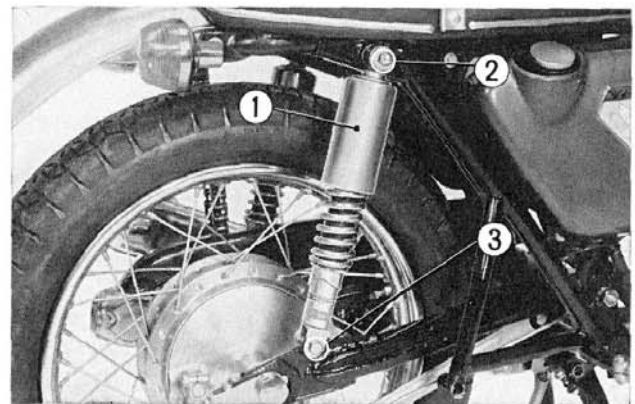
① Rear cushion ② Cap nut ③ Setting bolt
